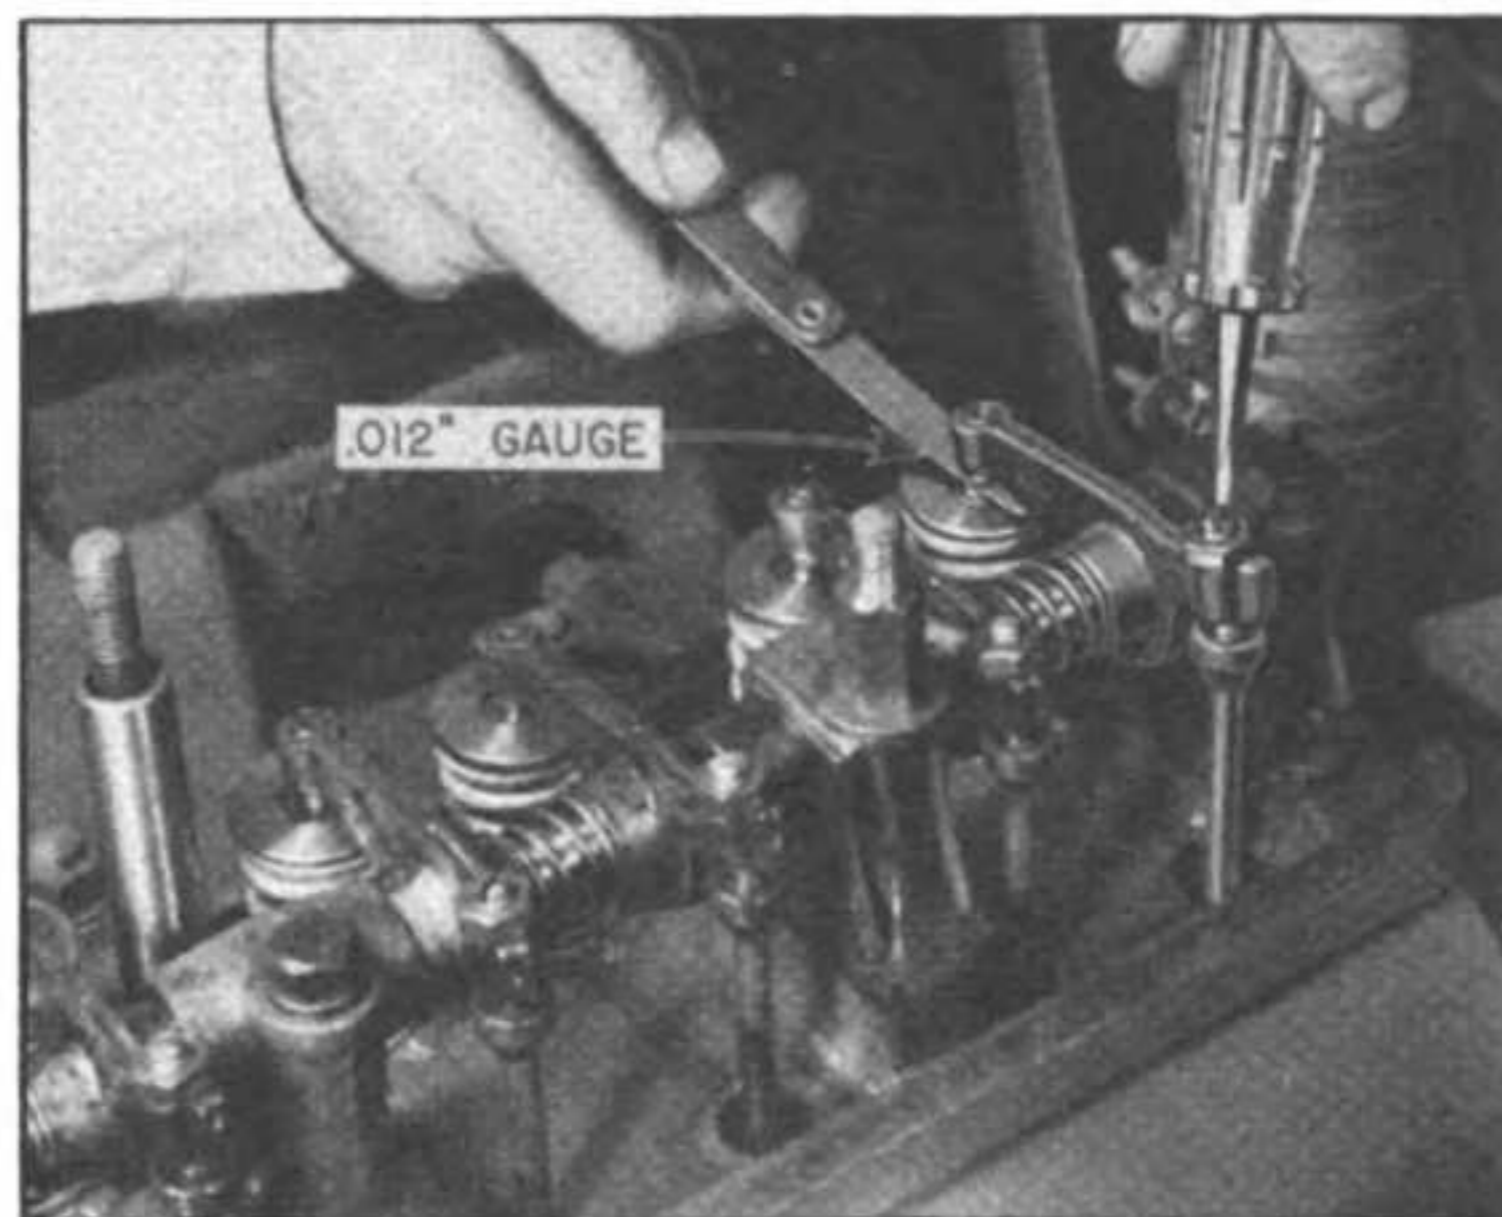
Setting Valve Clearance with Aid of Feeler Gauge
